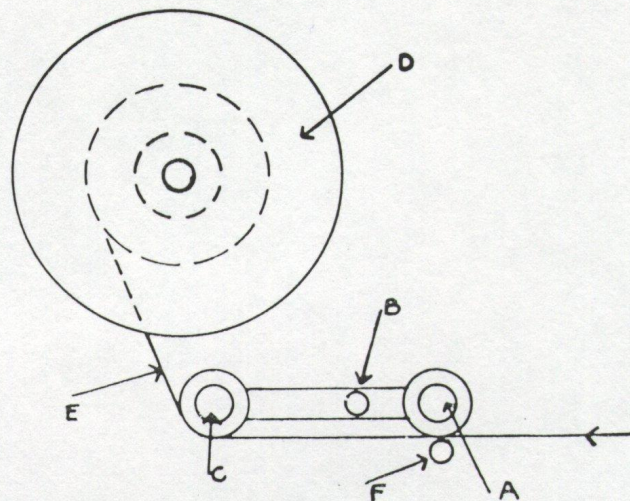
Mechanism for providing pinch roller pressure proportional to tape tension. A, pinch roller; B, pivot; C, guide roller; D, take-up spool; E, tape; F, capstan.
